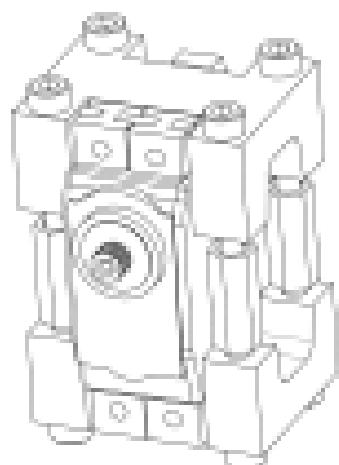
Servo Bracket Inner Ring Assembly
